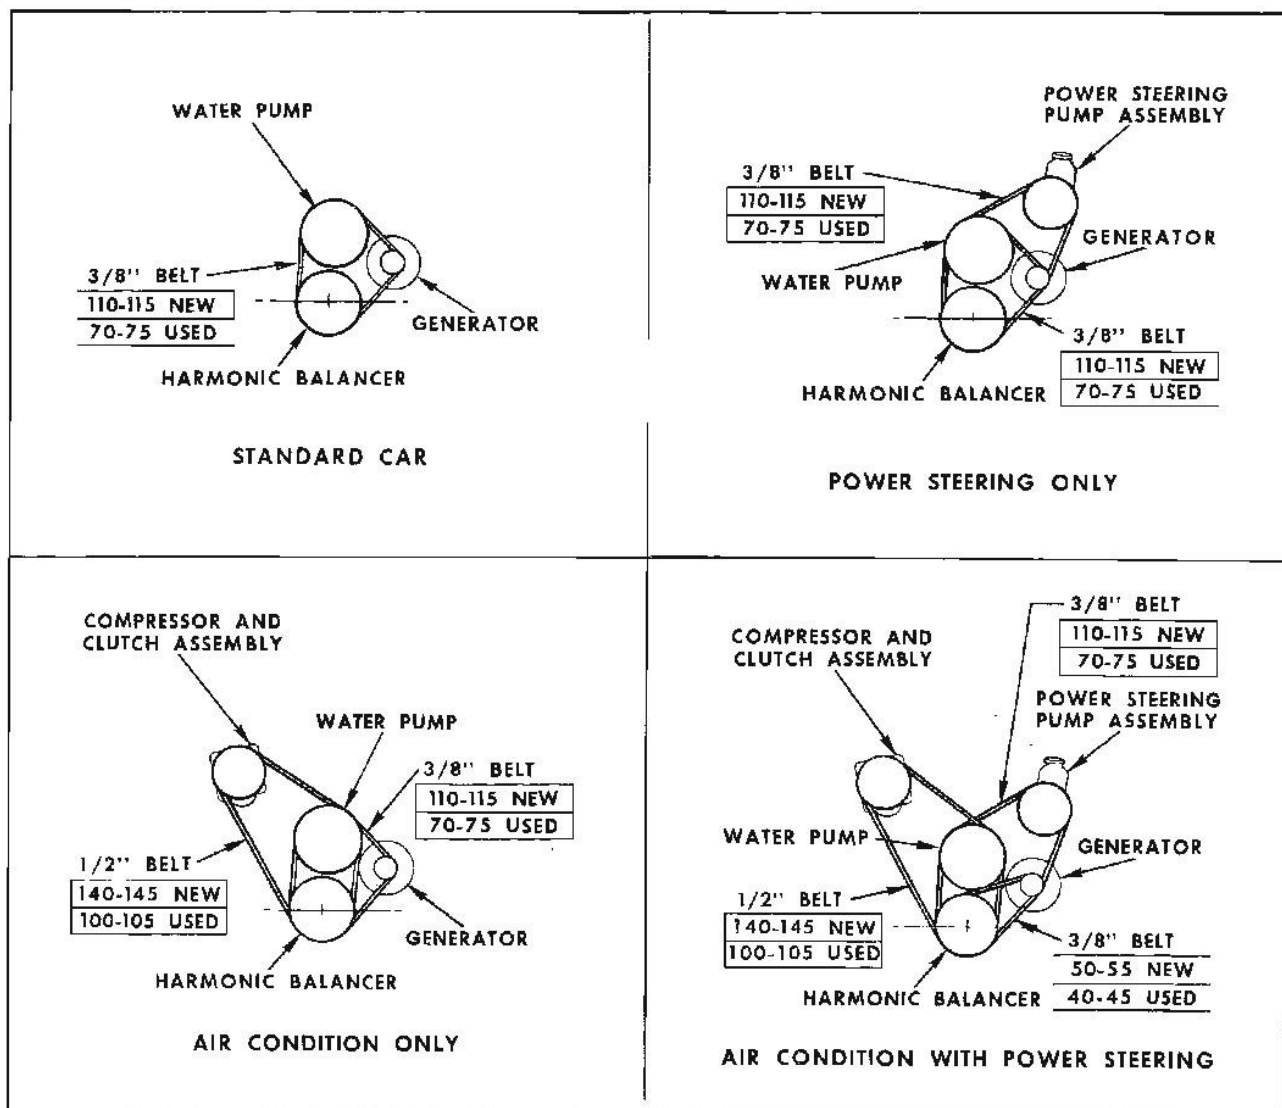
A-32 Belt and Pulley Diagrams - Six Cylinder Engine
